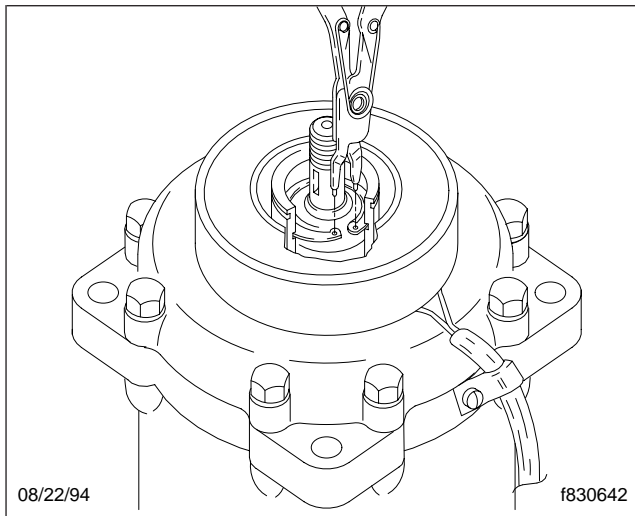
, Remove the Felt Ring Retainer and the Felt Ring
